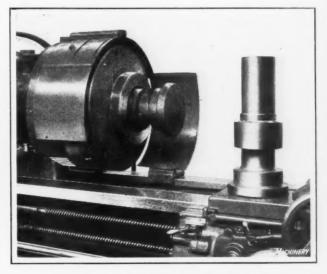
Chuck Plate used to hold Worm Quill during First Operation
